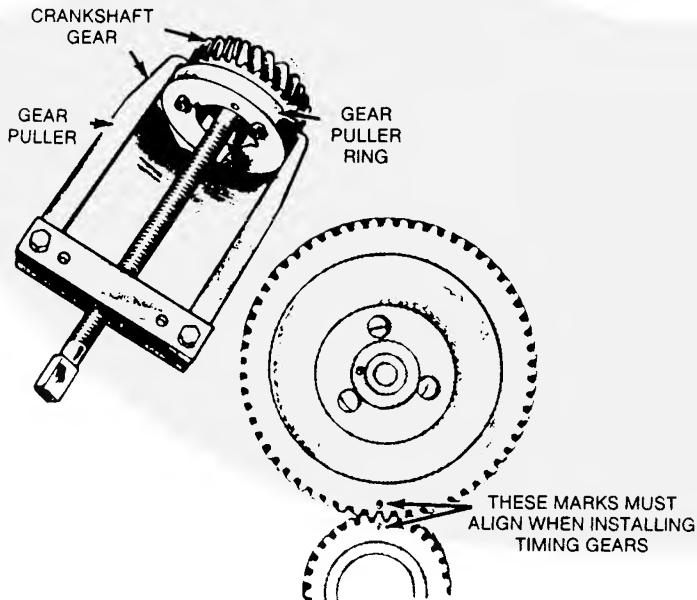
TIMING GEAR REMOVAL AND INSTALLATION
